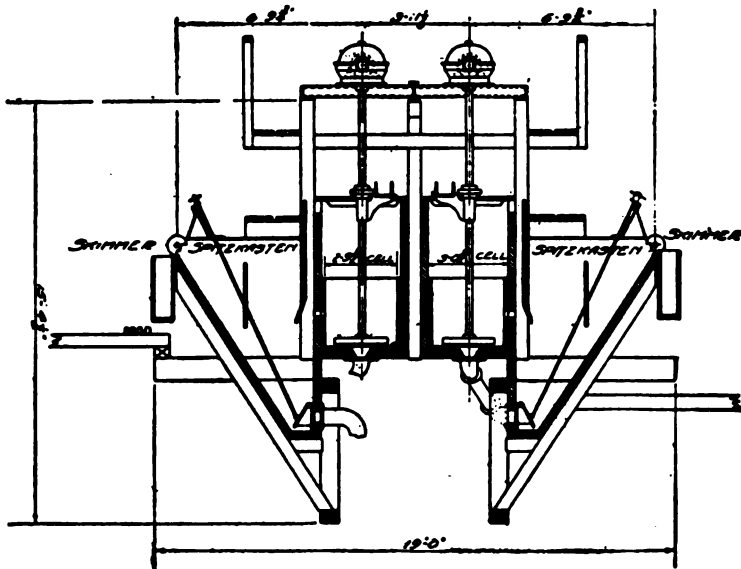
Standard M. S. Machines Placed Back to Back.
